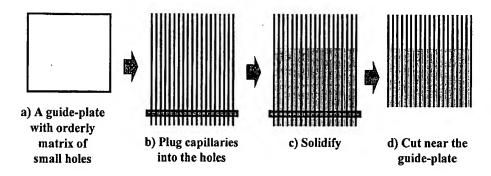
Fabrication of assembled capillary bundle using guide-plate method
